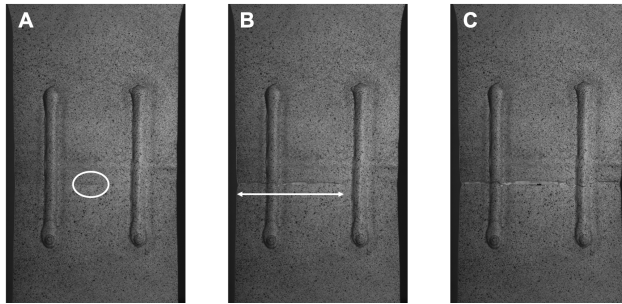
Fracture of specimen with cross weld speed 20 mm/s, without PWHT.
